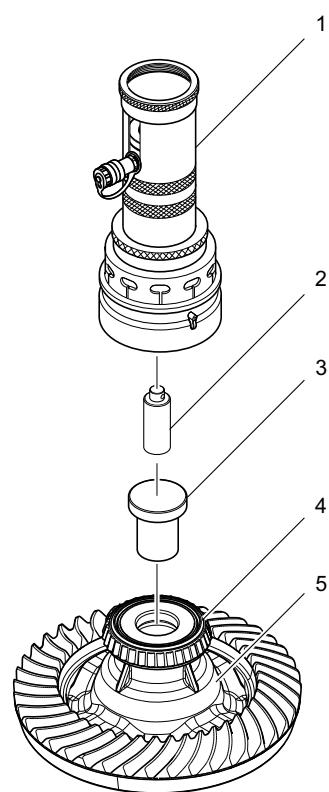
Hydraulic Bearing Puller Tool Assembly
